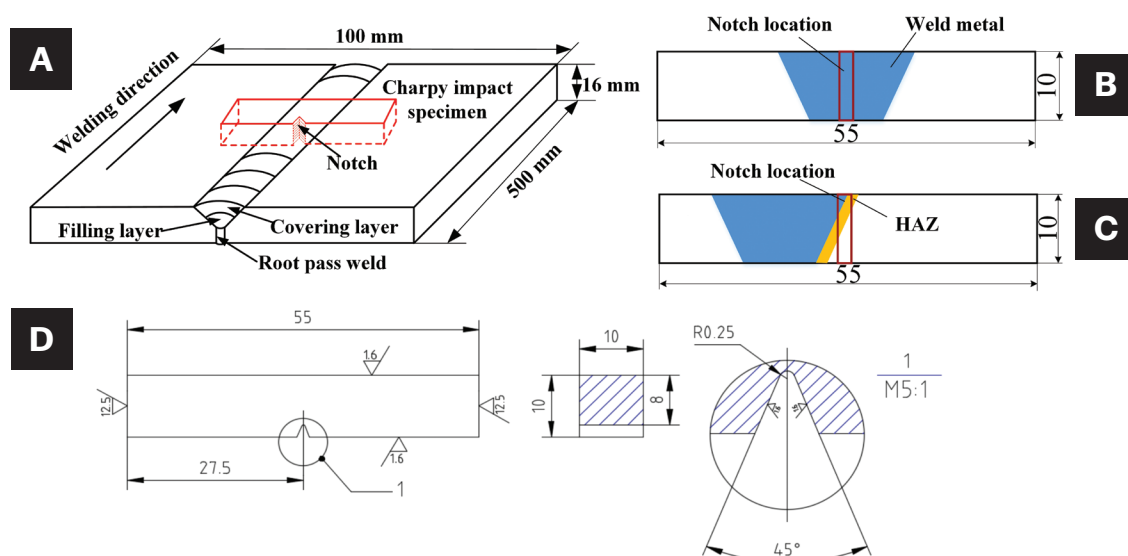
Charpy V-notch impact specimen prepared diagram: A – Specimens machined in the weld bead; B – notch location in weld metal; C – notch location in HAZ; D – standard dimension of V-Charpy impact specimen.
